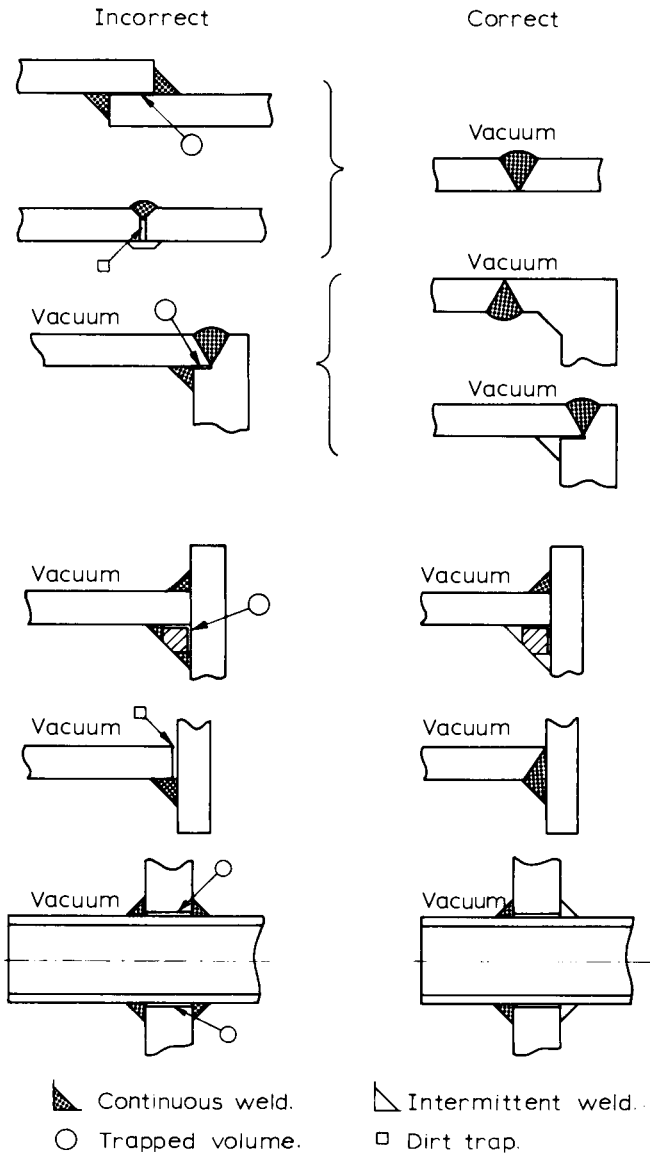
Examples of good and bad welding practice according to Kronberger⁴⁶
